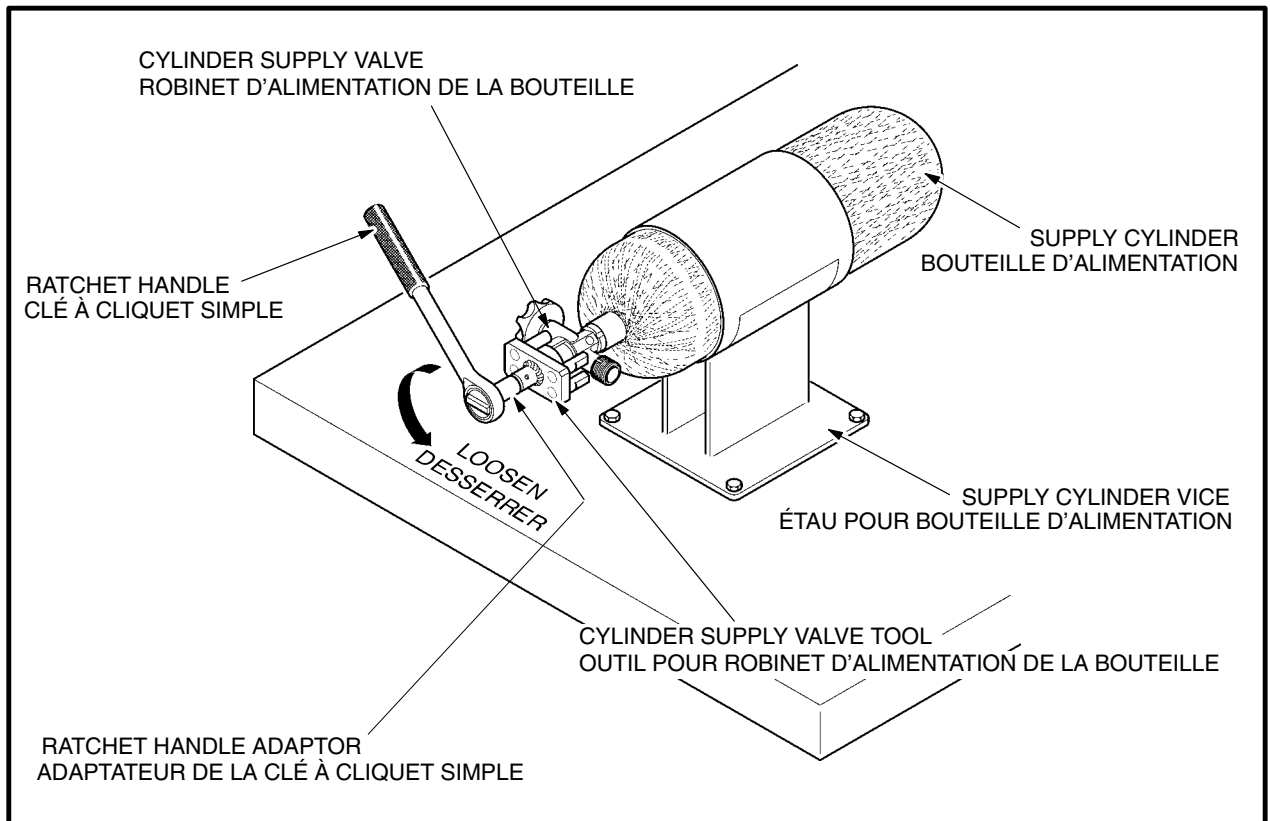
Cylinder Supply Valve Removal and Installation
